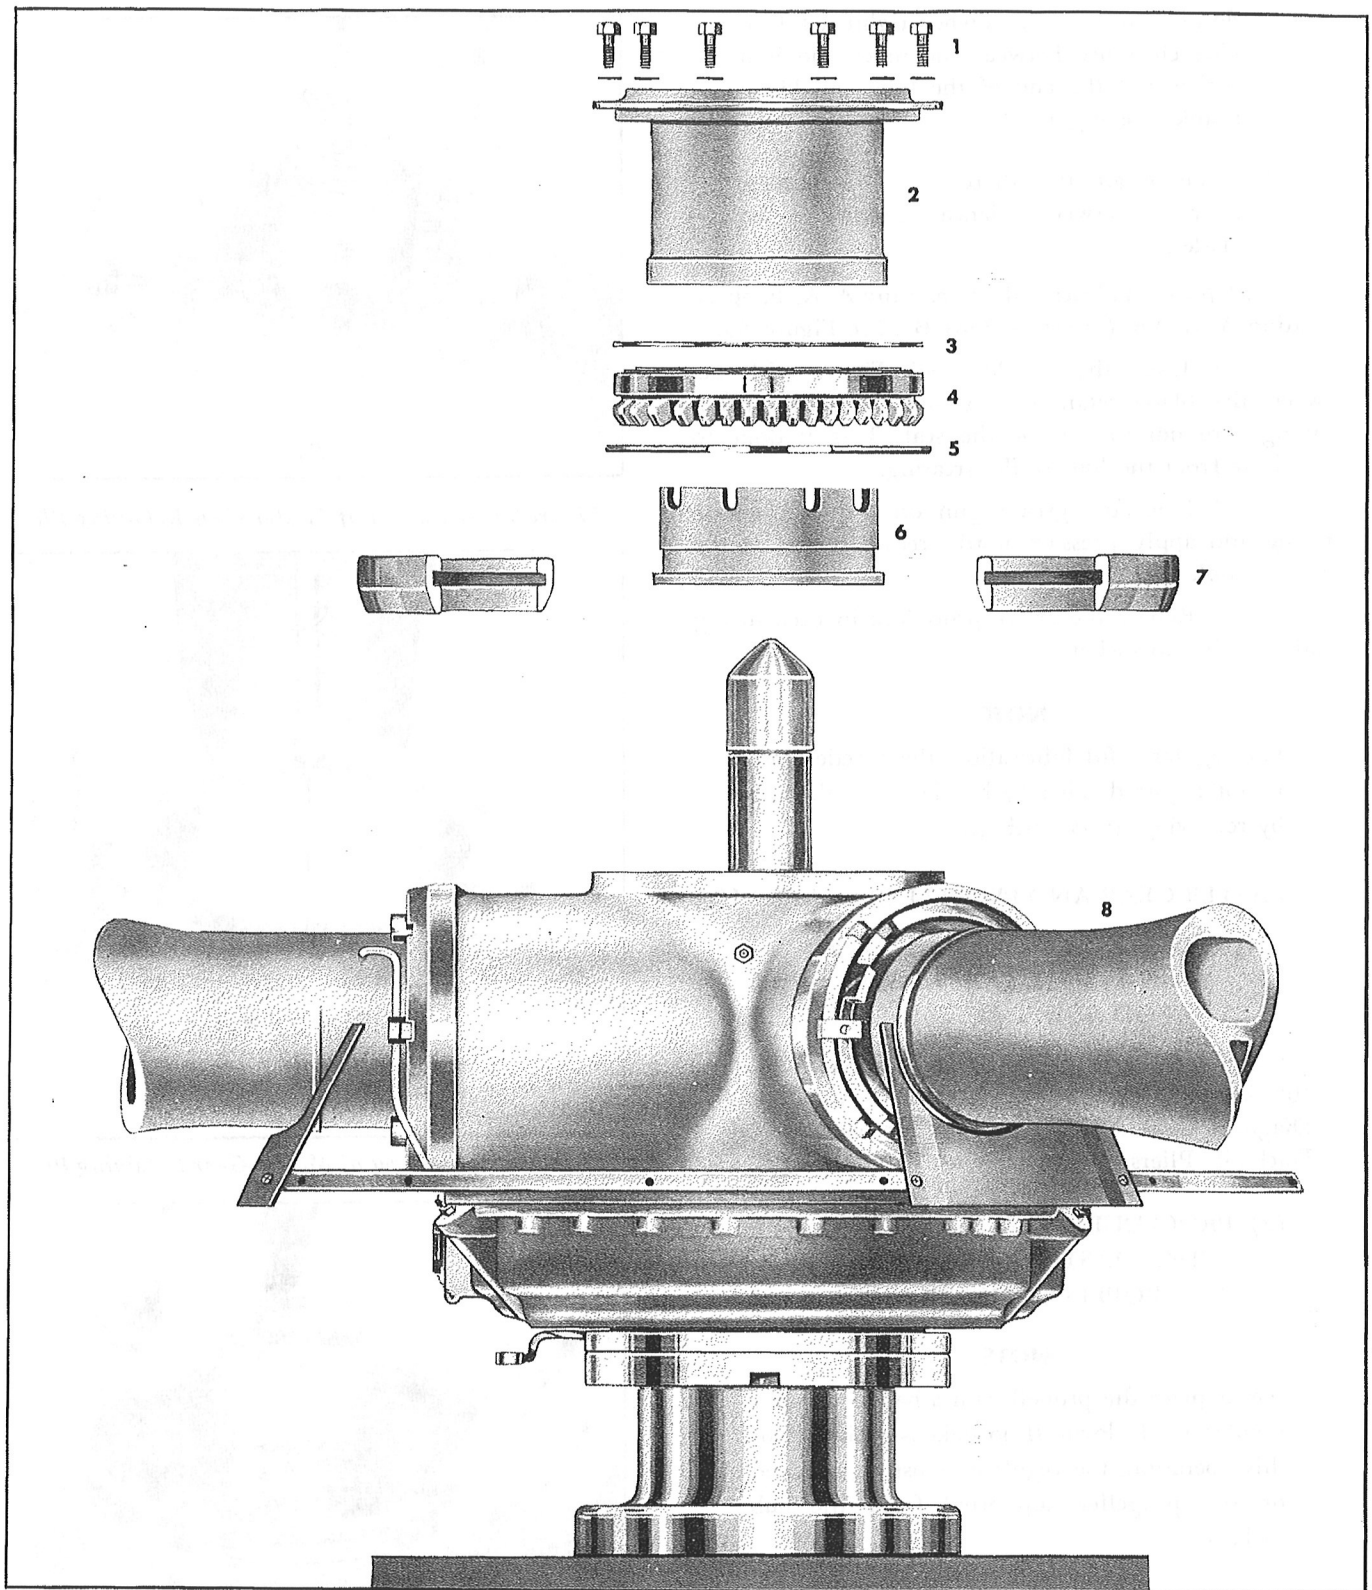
Master Gear, Propeller Shaft Nut, and Front Cone
